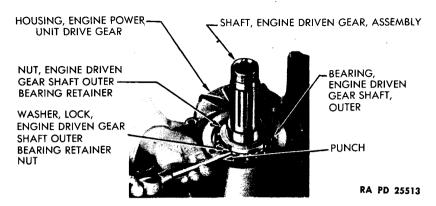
Bending Tabs Of Engine Driven Gear Shaft Outer Bearing
